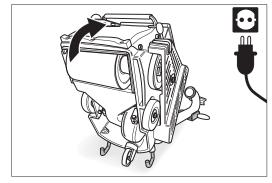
To check the machine setting, tilt the machine backwards. Ensure that the machine is standing securely!
